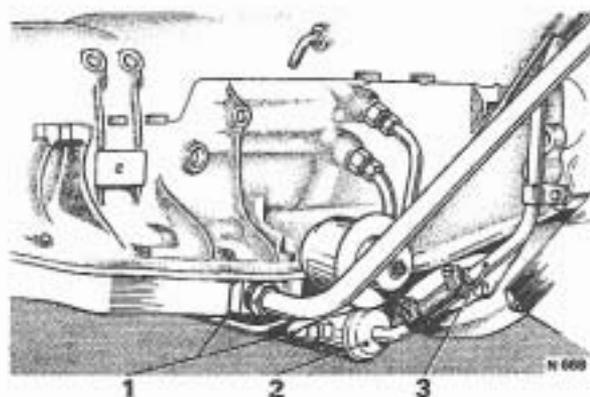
HEAT EXCHANGER FLUID PIPES (EARLY CARS)
